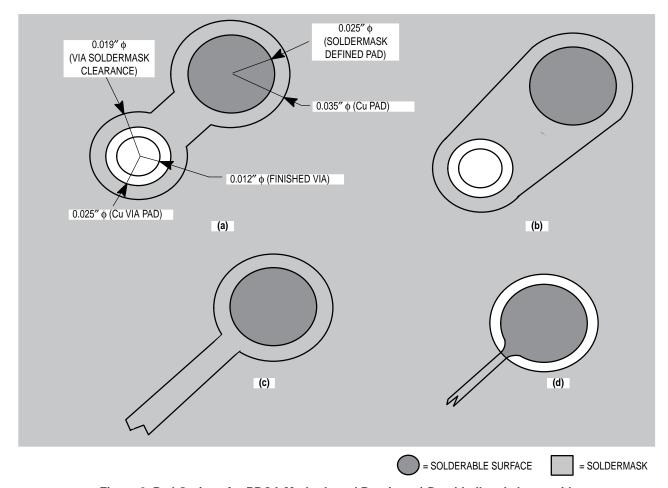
Pad Options for PBGA Motherboard Routing: a) Dumbbell pad shown with typical dimensions, b) Teardrop, c) No integral via for escaping onto top layer, d) PBGA version of standard surface mount pad with soldermask clearance around the solder pad.
